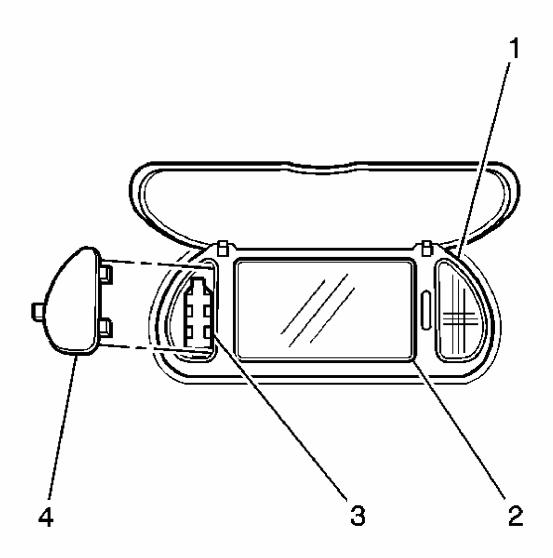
Removing/Installing Vanity Mirror Lamp Courtesy of GENERAL MOTORS CORP.
